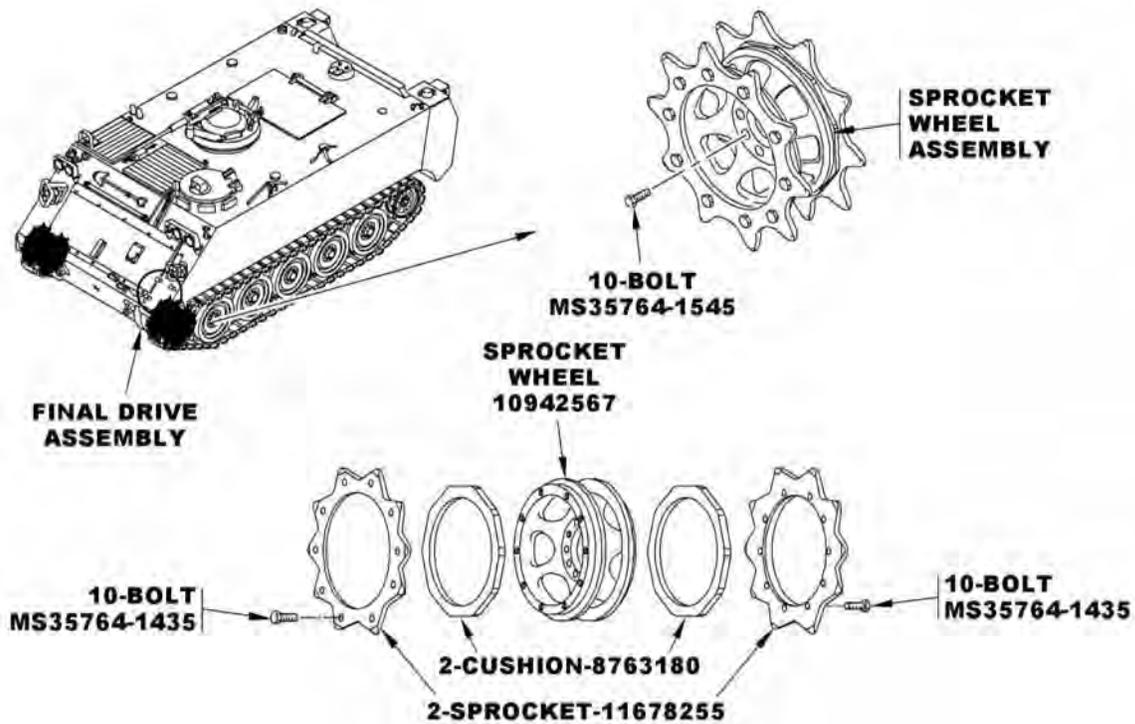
Remove One T130E1 Track Assembly and Sprocket Wheel Assembly from Vehicle
